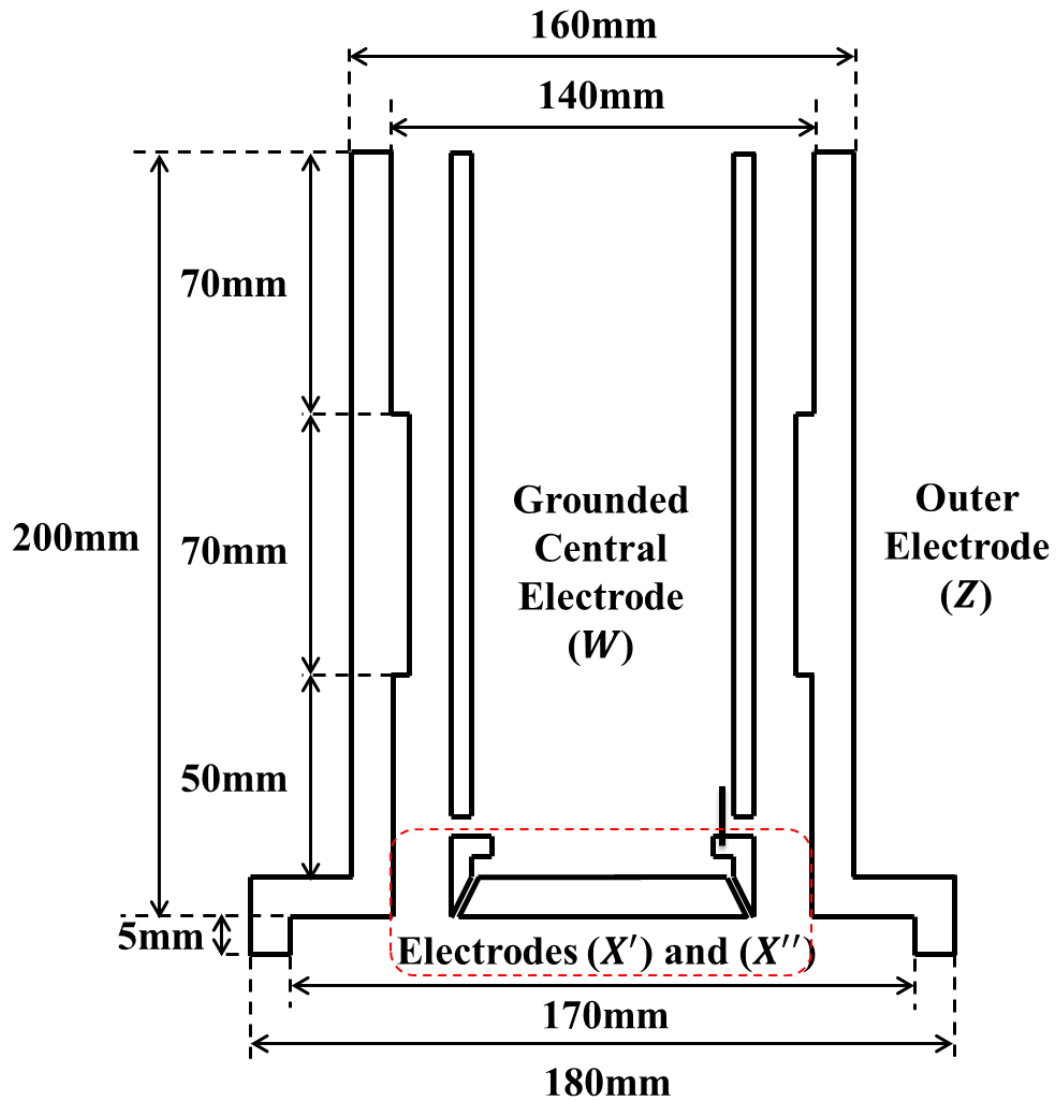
Dimensions of the upper half of the concentric cylindrical measurement geometry.
